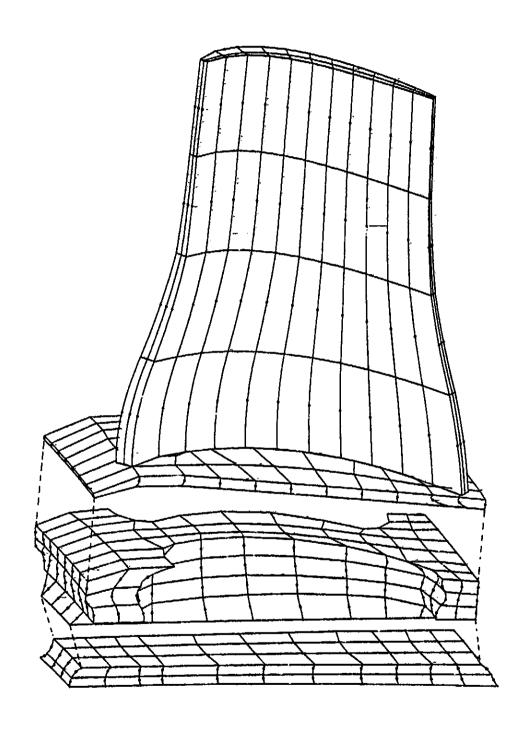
Final Blade Design -- Airfoil, Platform, and Shank
